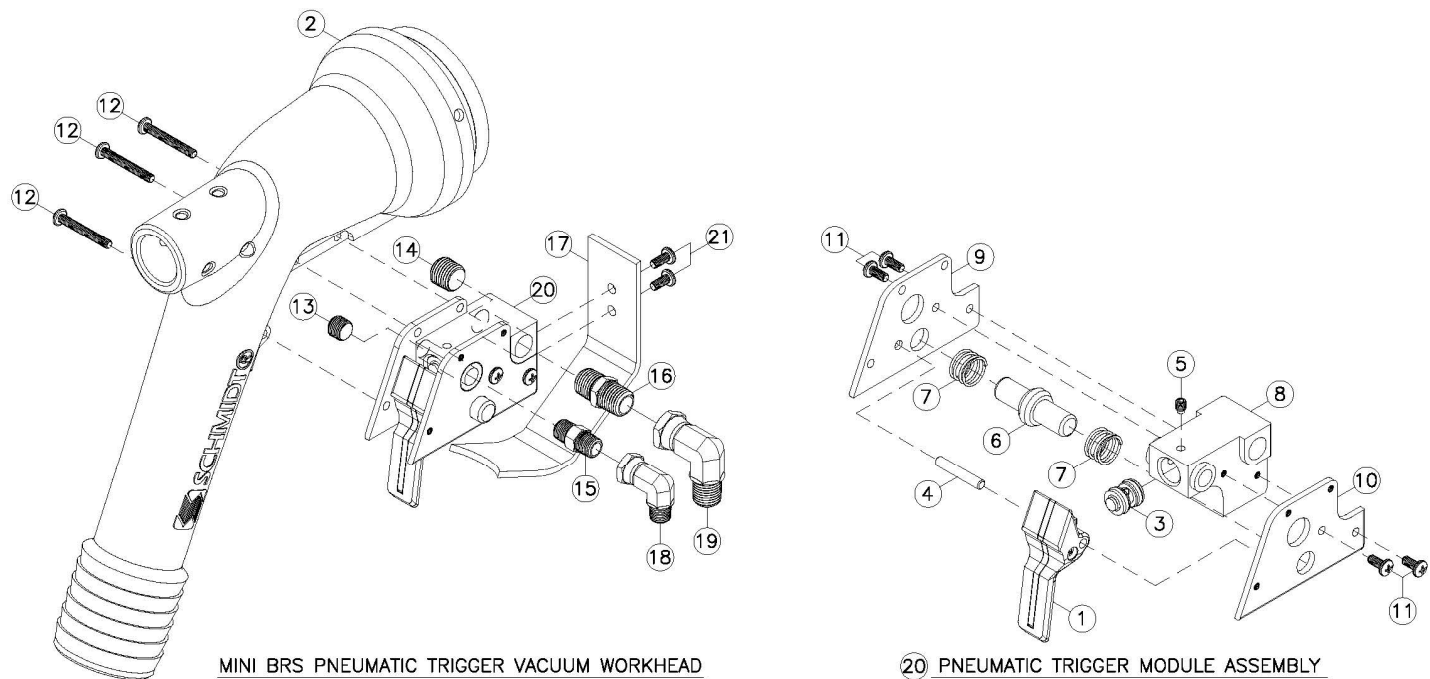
G2 Trigger Vacuum Workhead General Assembly
